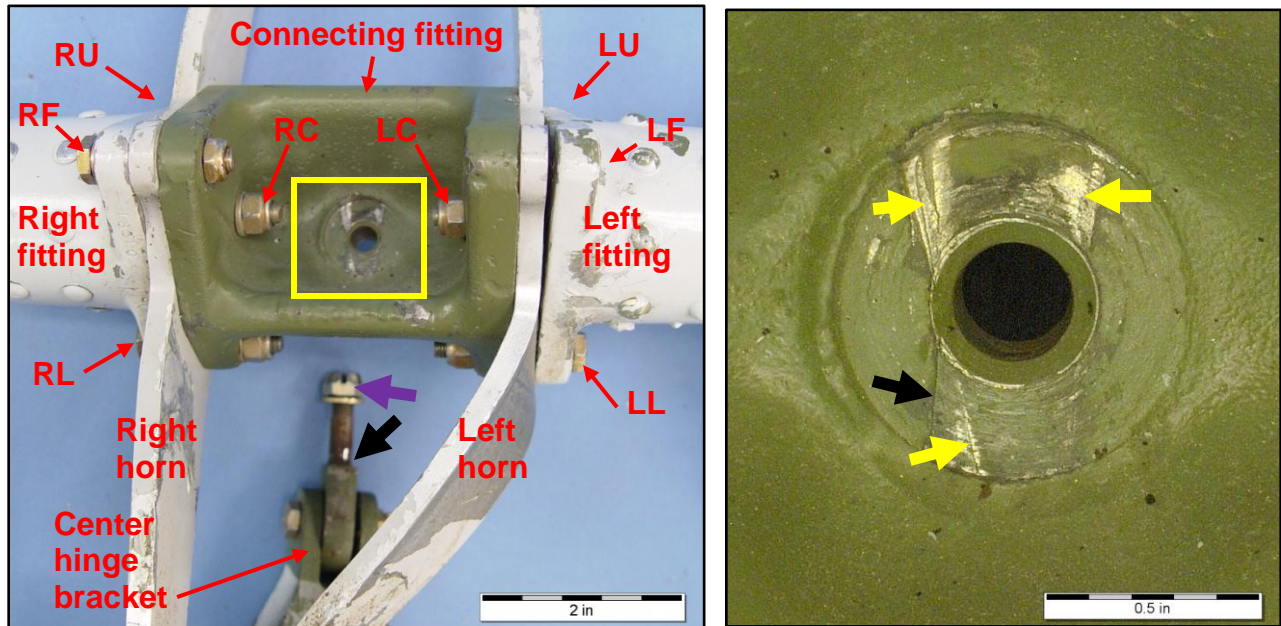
The elevator torque tube assembly looking aft with the center hinge bracket removed (left) and a close up of the area within the yellow box (right).
